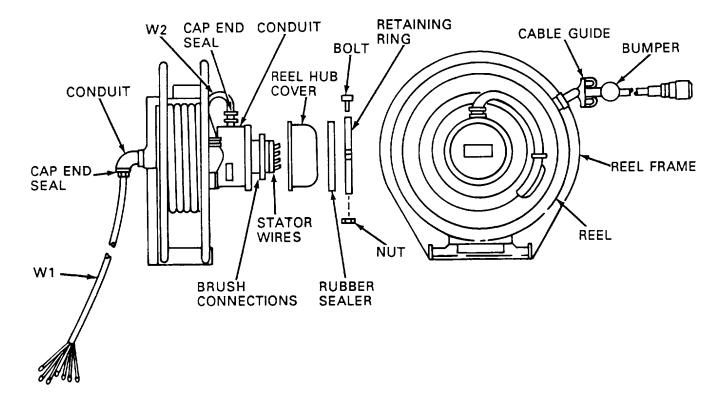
Power Cable Assembly LM 91103672 on Reel Unit RL-280 (P/O AN/GLQ-3).
